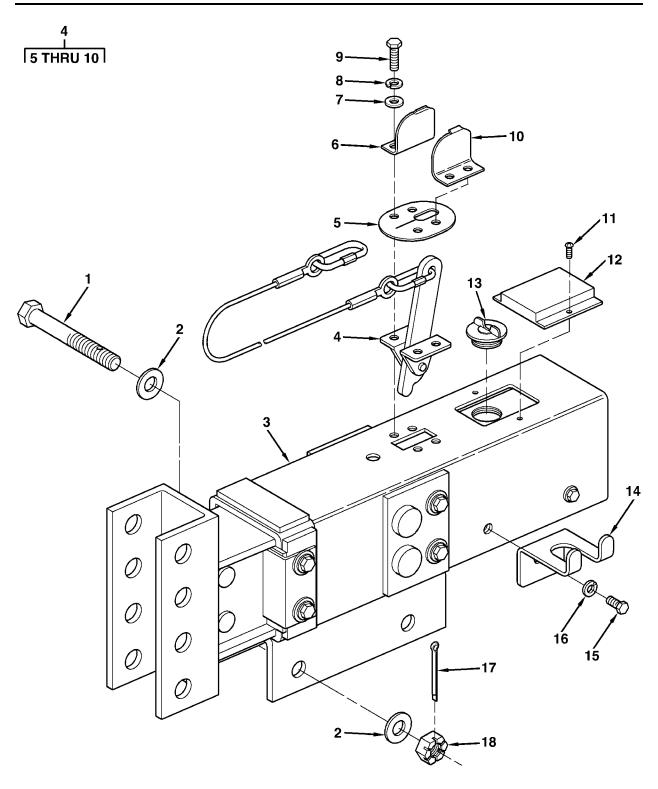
BRAKES ACTUATOR ASSEMBLY
